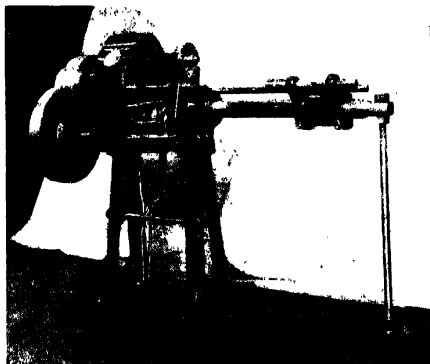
Semi-automatic thread-rolling machine. (Hordern, Mason & Edwards, Ltd)
